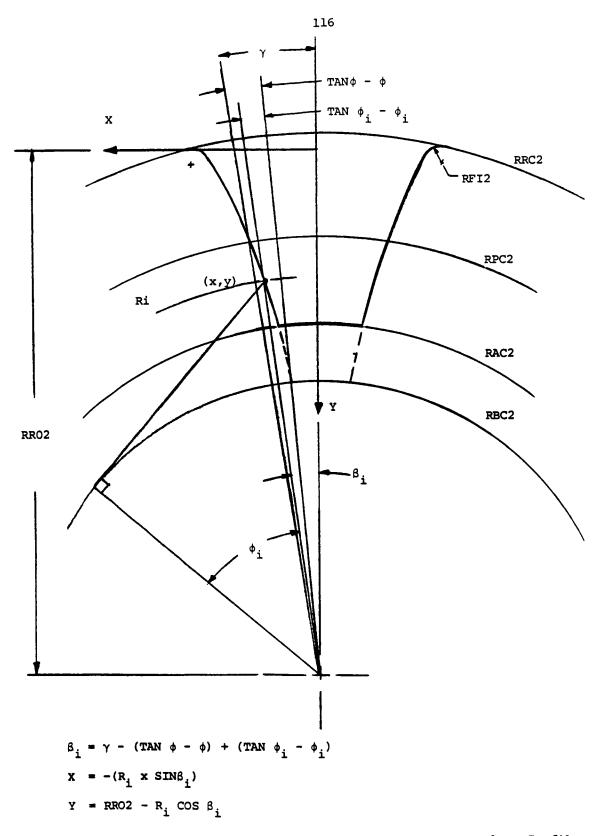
Construction of Internal Gear Tooth Involute Profile
